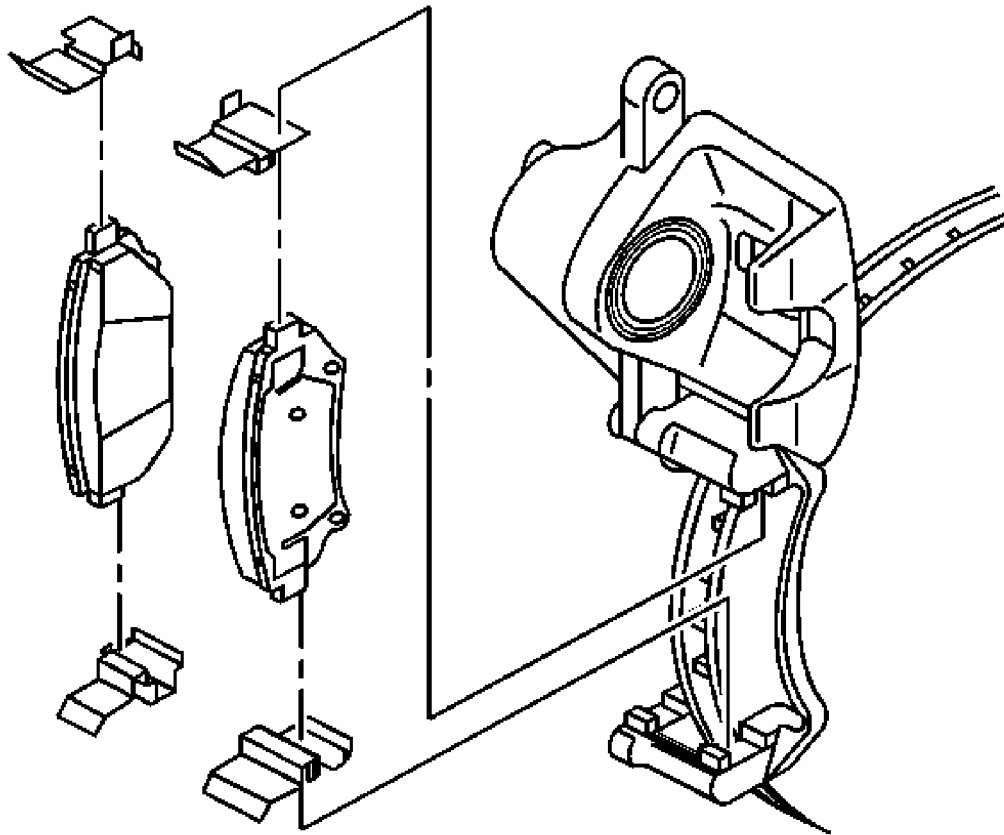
View Of Brake Pads & Caliper Bracket - Rear
